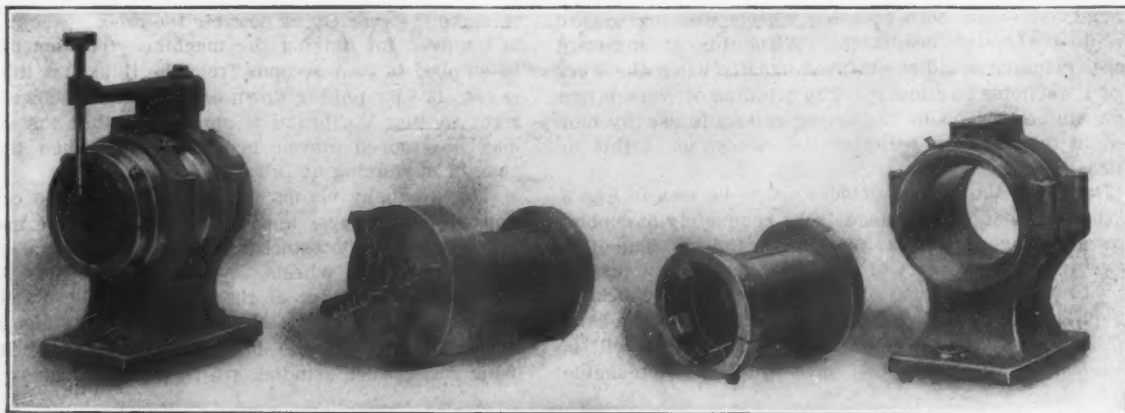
The Two Headstocks—One Assembled and the Other with Its Interchangeable Chucks Removed.
